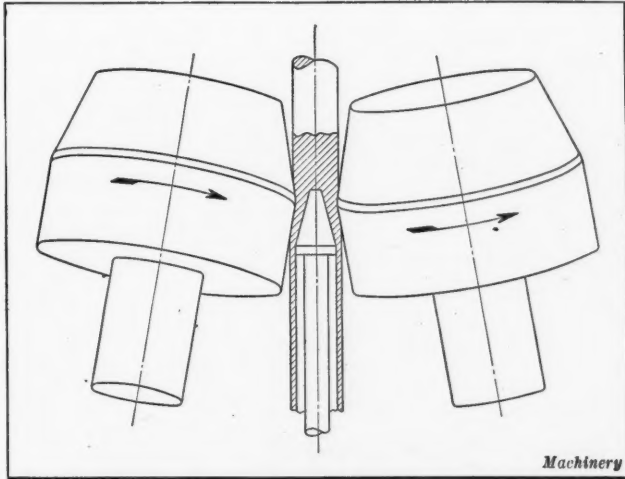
Diagram of Piercing Operation showing the Revolving Rolls of Piercing Machine and End of Mandrel over which Billet is forced
